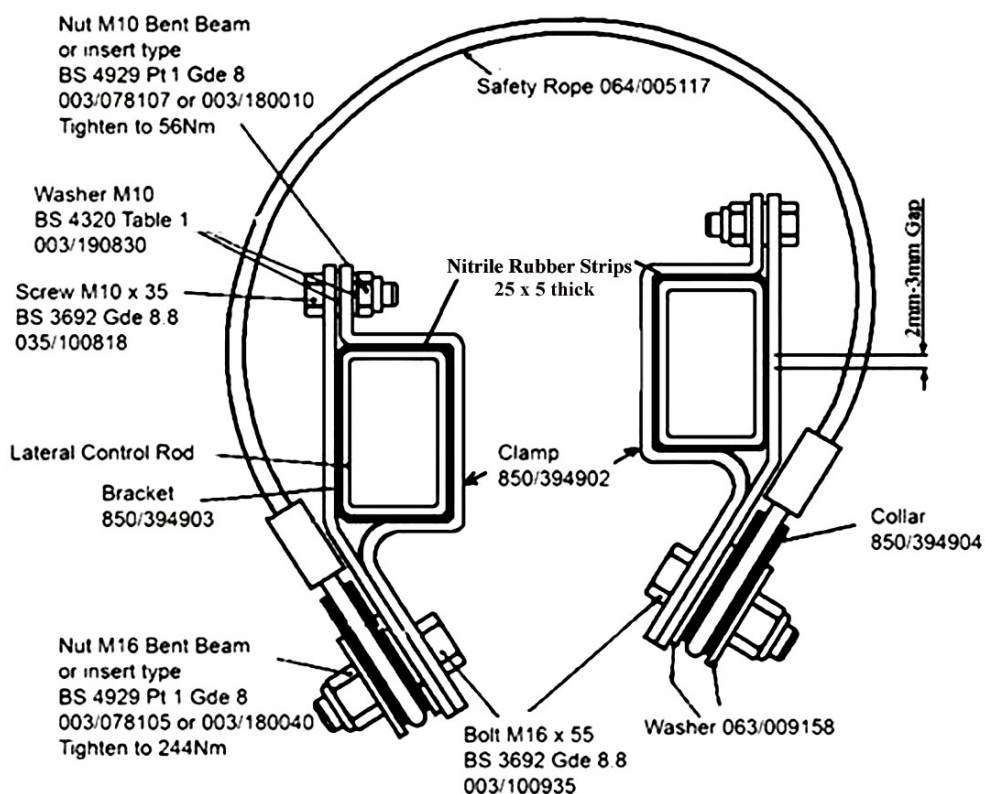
Assembly of Rod-to-Rod Safety Rope and Brackets
